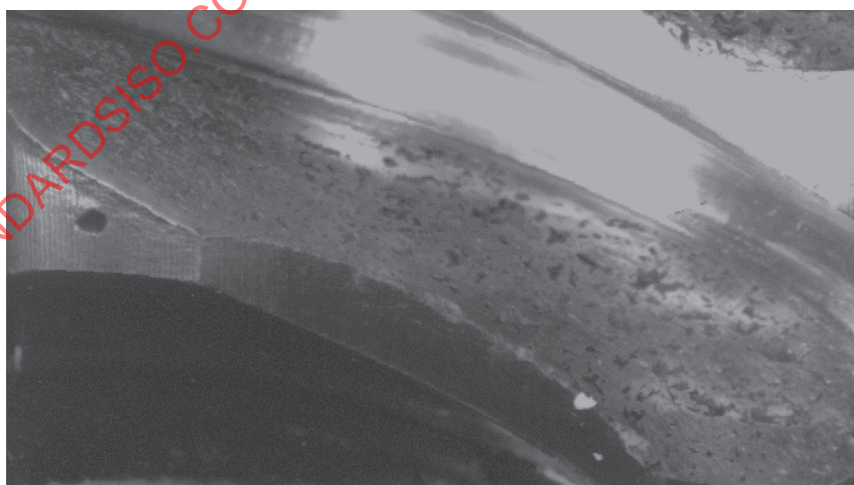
Same flank as in [Figure 5](#), after macropitting has been removed
